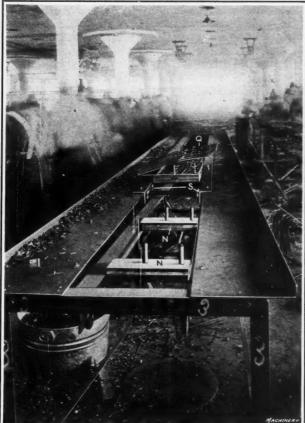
Progressive methods of assembling are used in manufacturing automobile cushion springs. In the Detroit Wire Spring Co.'s factory, the Palmer-Bee Co. has installed equipment for handling this work. The spring frames are placed on small trucks, on which they are carried along the bench from man to man, and the various parts of the spring are put together
